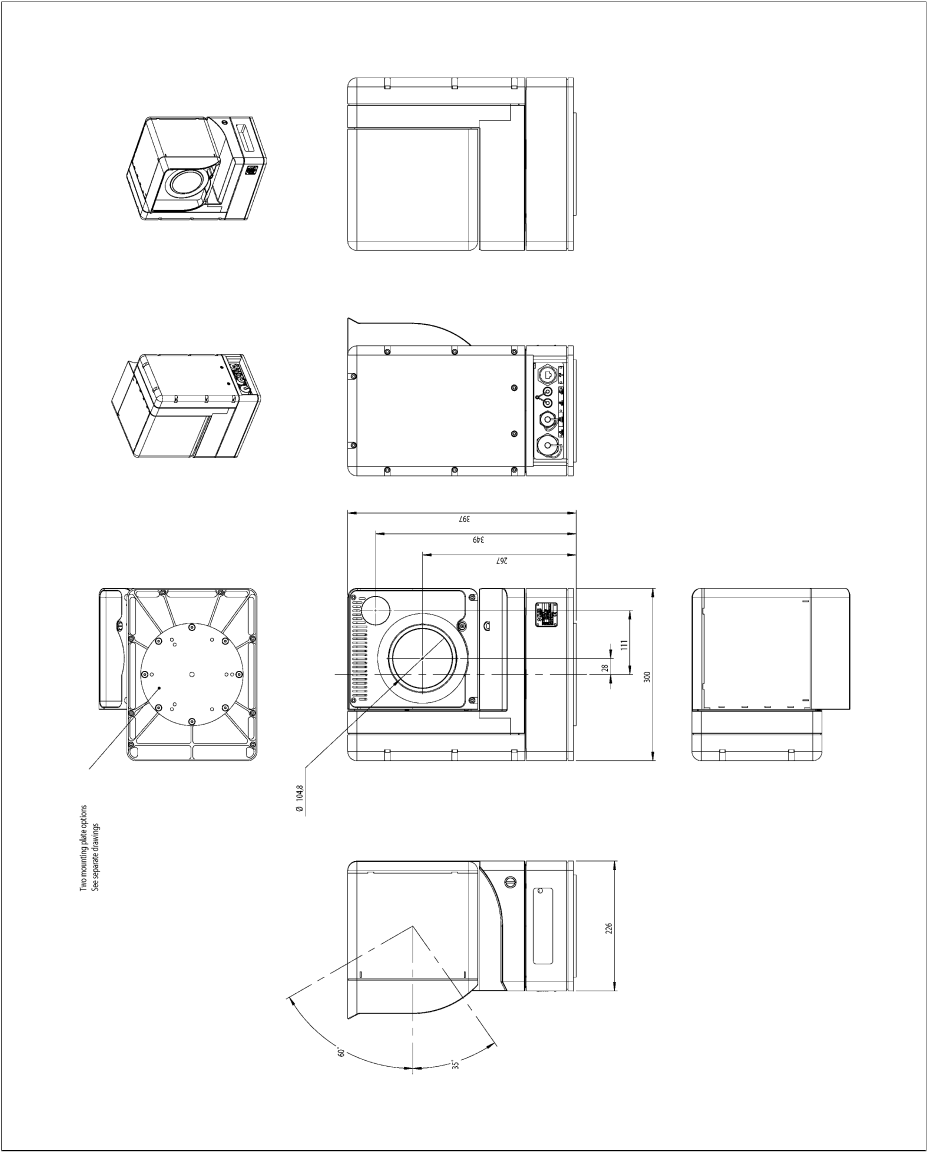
Basic dimensions 4 – Pan/tilt head (PTH)
